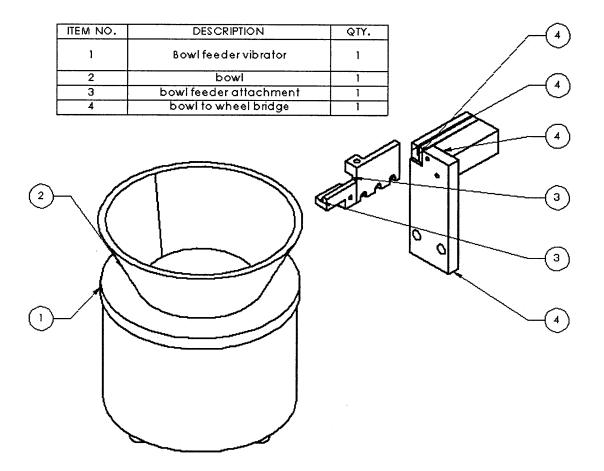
The bowl feeder assembly. The bowl and vibrating units here are simple models.
